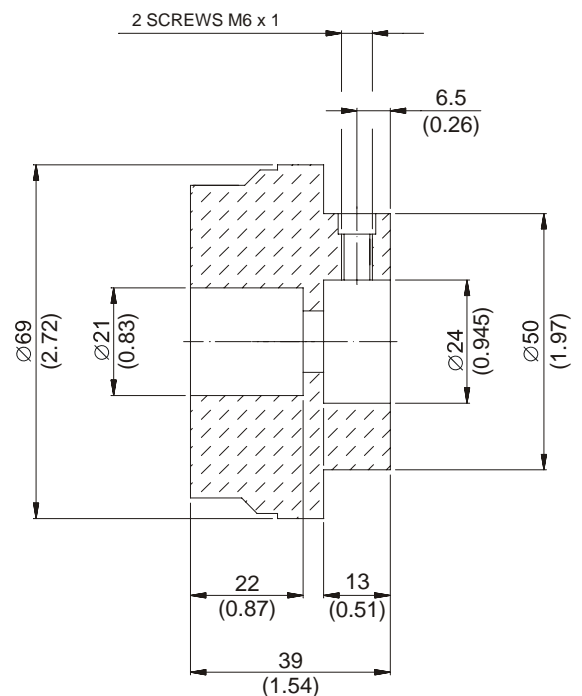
Dimensional Drawing of the TP302 and Magnet
